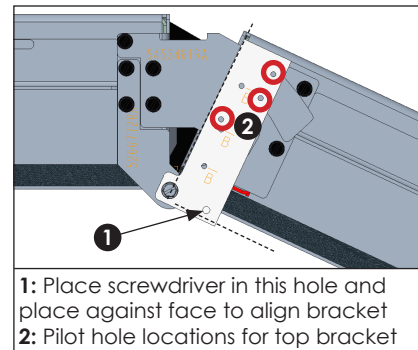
Jig Placement and Pilot Hole Locations (Top)
